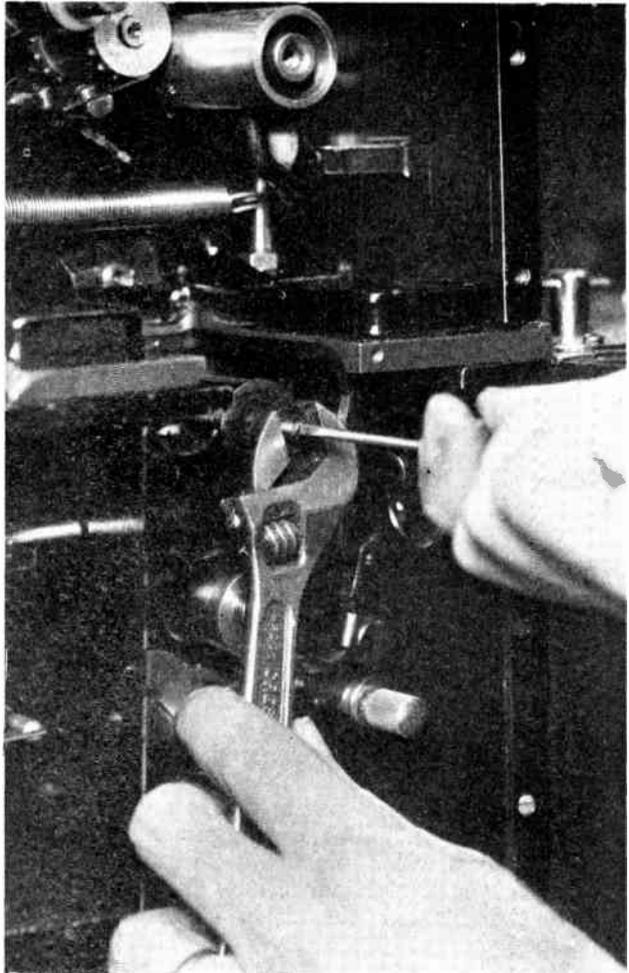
ADJUSTING THE LATERAL GUIDE ROLLER ON TYPE PS-10 SOUNDHEAD.
